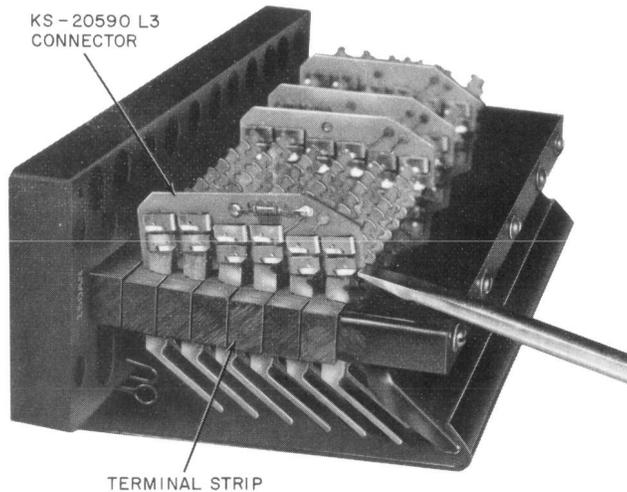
Removal of KS-20590 Connector from Terminal Strip
